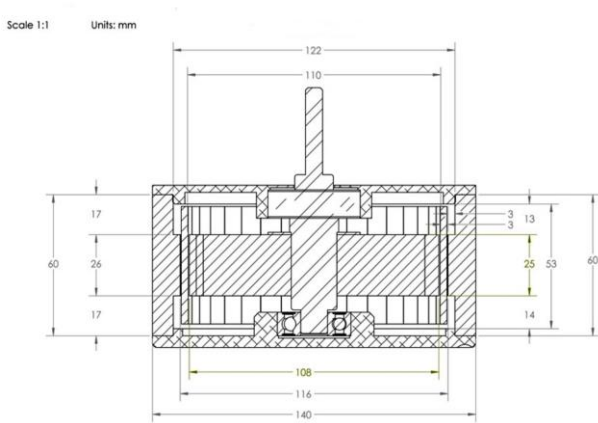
Cross sectional view of coreless BLDC motor with dimensions
